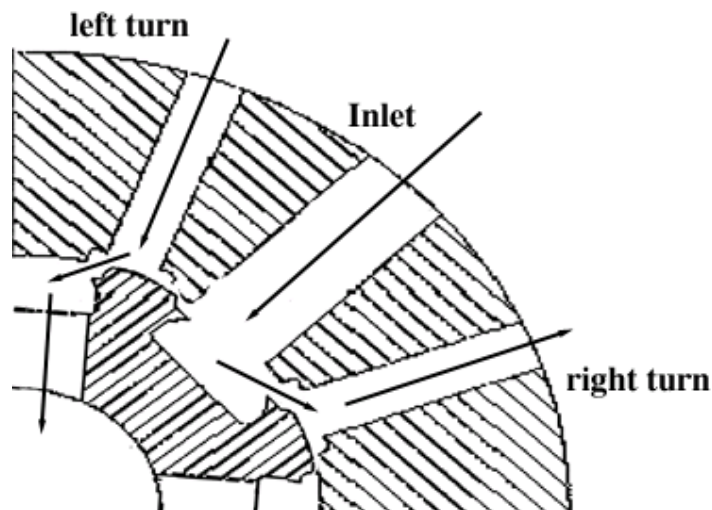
Sketch of one quarter of the rotary valve during right turn
